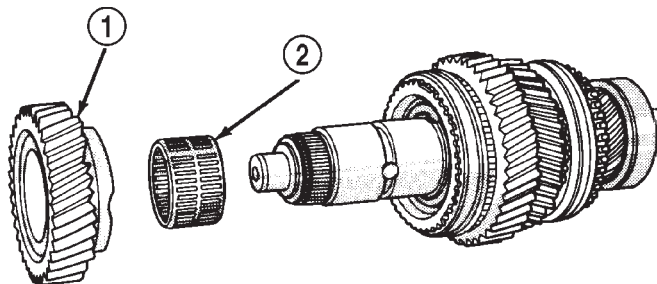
SECOND GEAR AND NEEDLE BEARING
